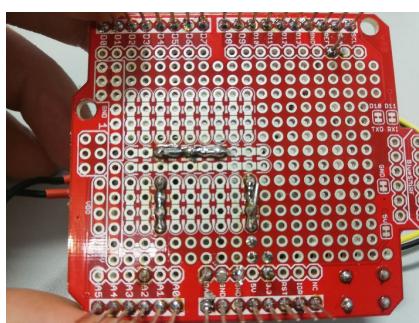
Bottom view of the Temperature Monitor circuit showing solder bridges connecting the individual components.
